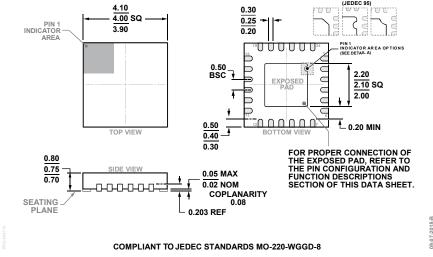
24-Lead Lead Frame Chip Scale Package [LFCSP] 4 mm × 4 mm Body and 0.75 mm Package Height (CP-24-10) Dimensions shown in millimeters
